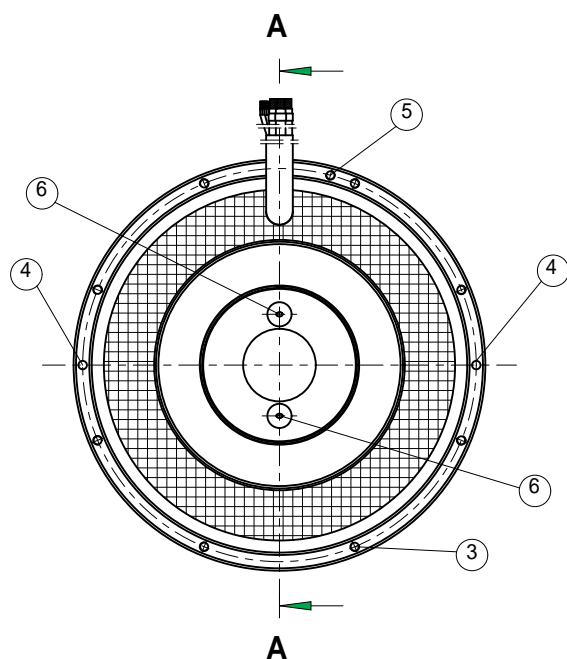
1MB 312 frameless spindle motor- dimensional data (part 1)
